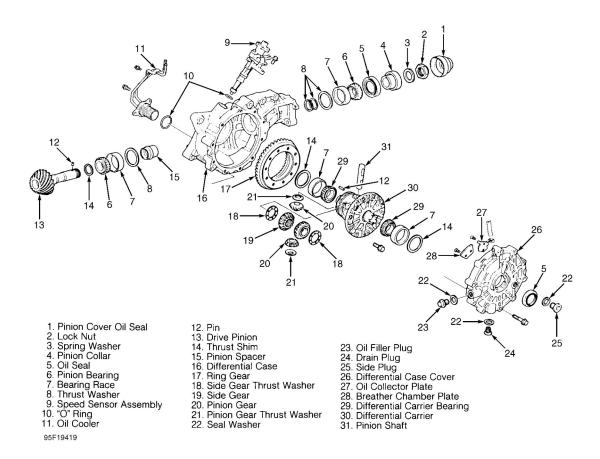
Exploded View Of Differential Assembly Courtesy of AMERICAN HONDA MOTOR CO., INC.
